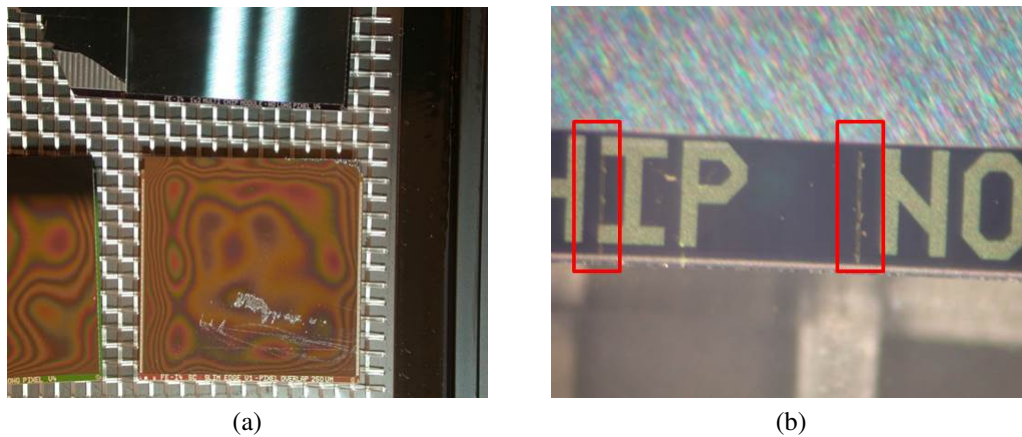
Visual inspections on IBL module prototypes, showing (a) residues of the polyimide glue on the FE back side, and (b) signs of the laser scanning at the sensor edges.
